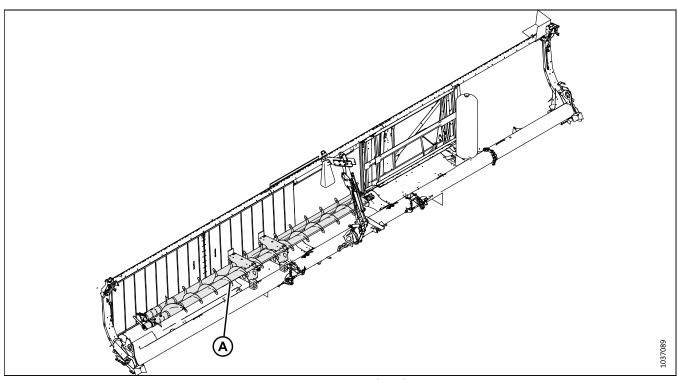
Double-Reel Header with Two-Piece Upper Cross Auger (UCA)
